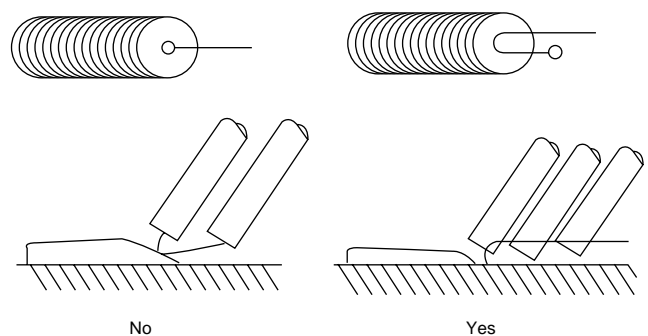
The backstep technique prevents porosity at the arc starting area of the weld bead
